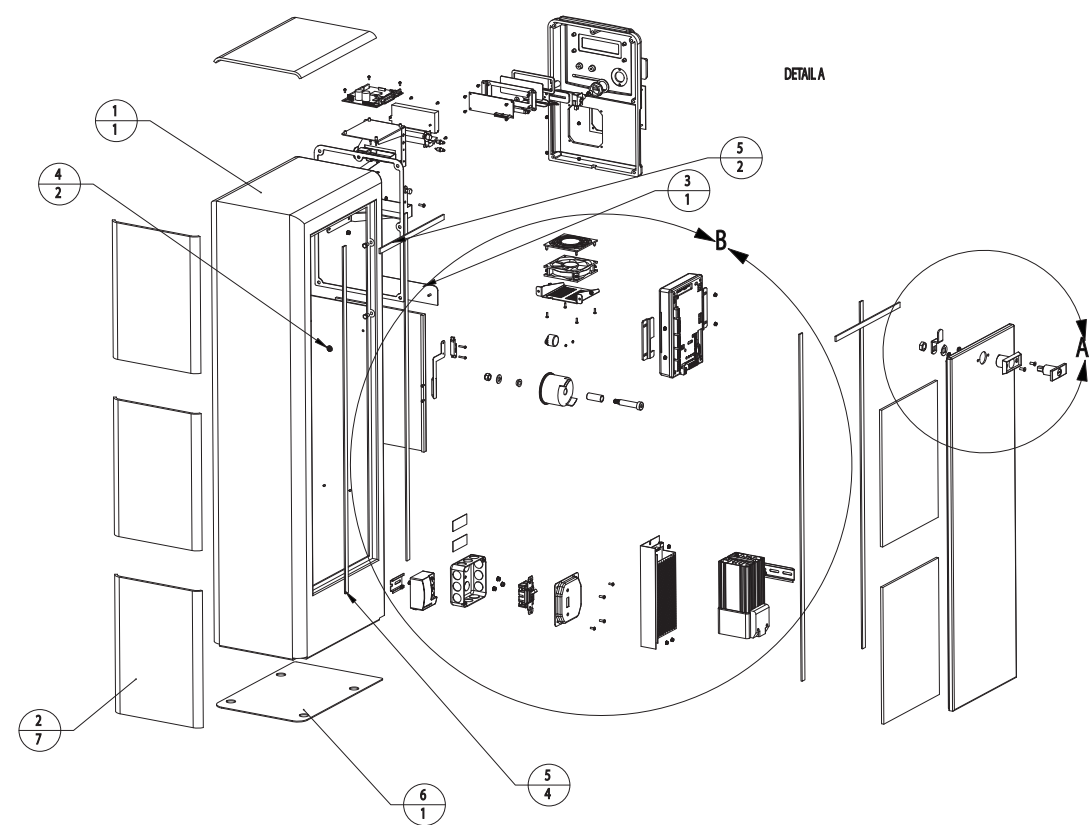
Barcode Ticket Dispenser (220VAC) Drawing, Detail A
